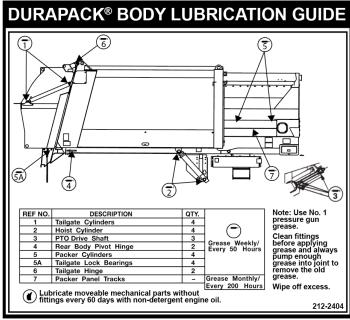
DuraPack Body Lubrication Guide, PN 212-2404
